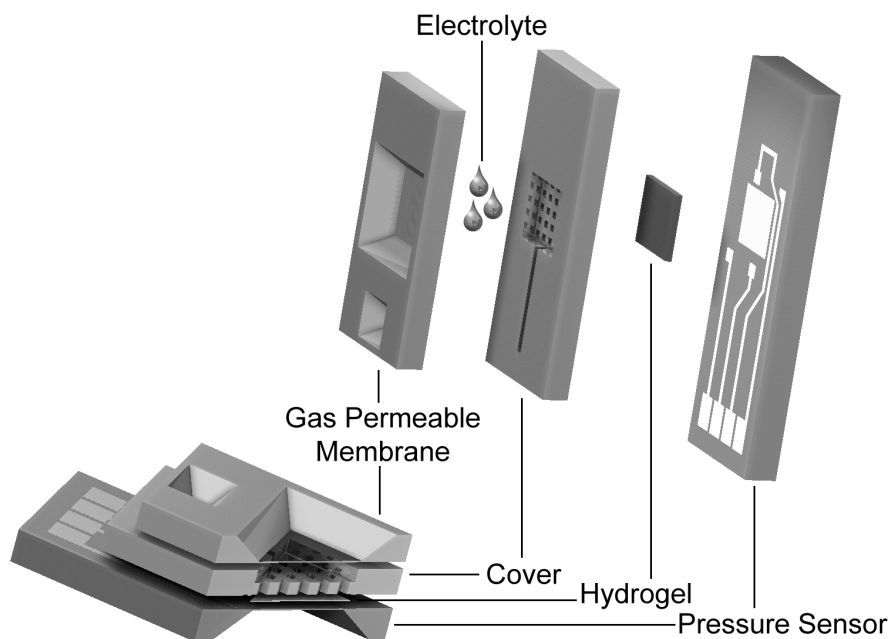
Exploded view of all parts and assembly drawing of the final hydrogel-based CO_2 sensor.
